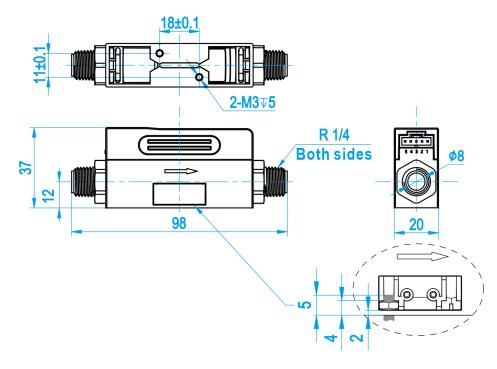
FS4308 dimensions with BSPT (R 1/4") connectors.
